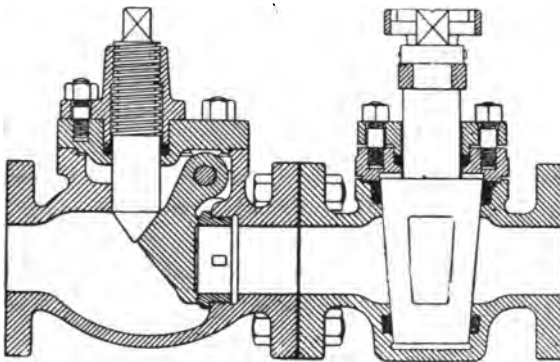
Section of adjustable isolating valve and blow-down cock.
